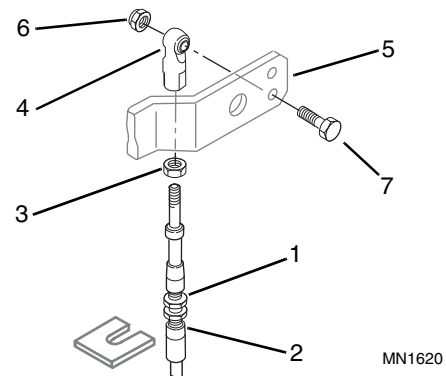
Park Lock Cable Operator Protective Structure Mount
